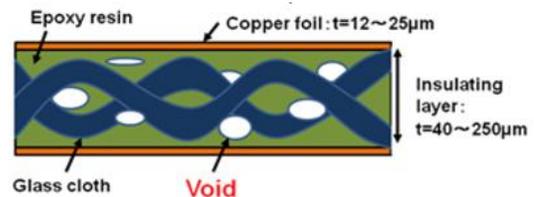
Specimen model: thickness of the insulating layer is 40-250 µm, copper foil id 12-25 µm, and panel size 600X600 mm
